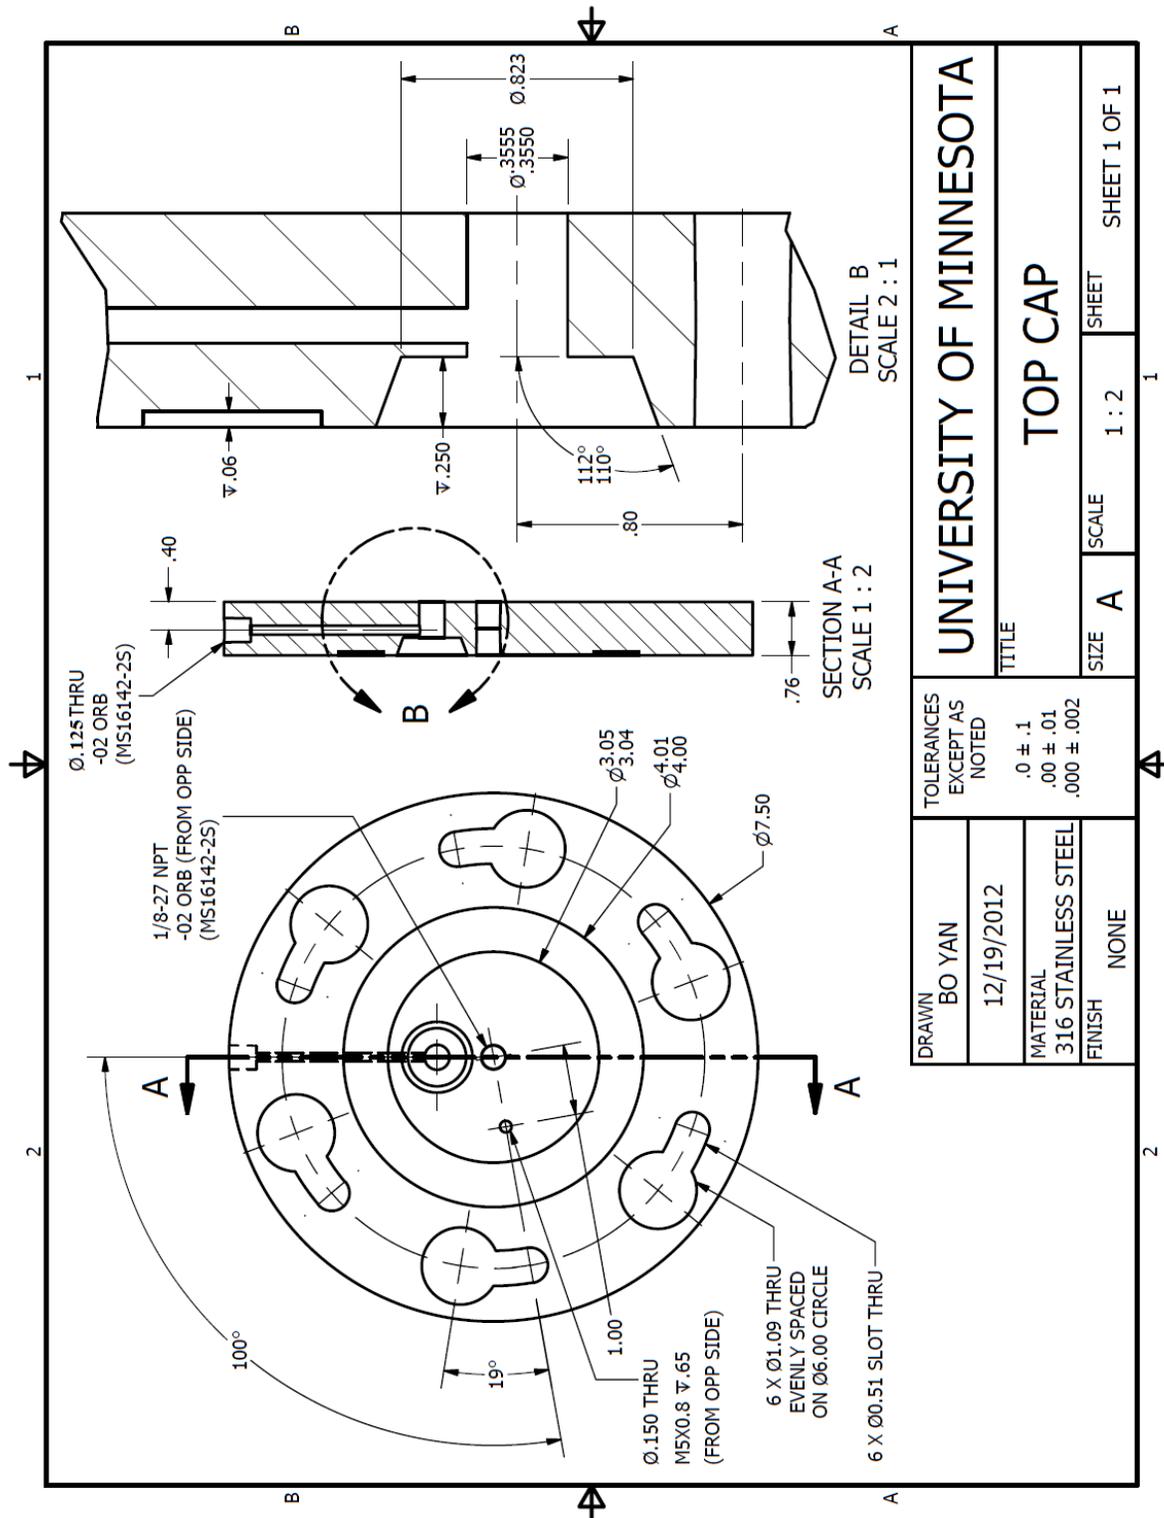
Detailed engineering drawing for the top cap of the high pressure compression/expansion chamber
